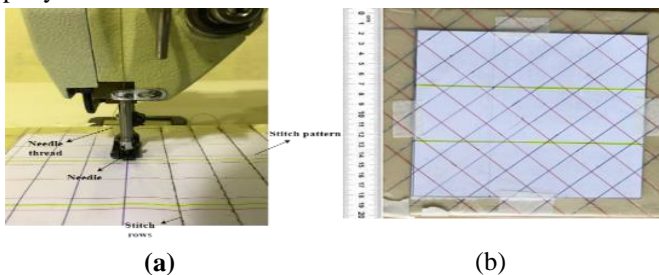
a) Industrial sewing machine, b) Specimen with $\pm 45^\circ$ stitch pattern before stitching
